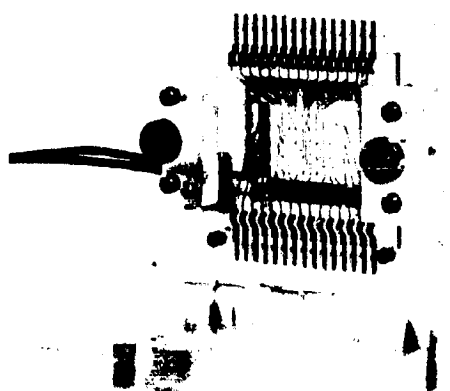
MOUNTING FIXTURE FOR HOLOGRAPHIC STORAGE MATERIAL.
